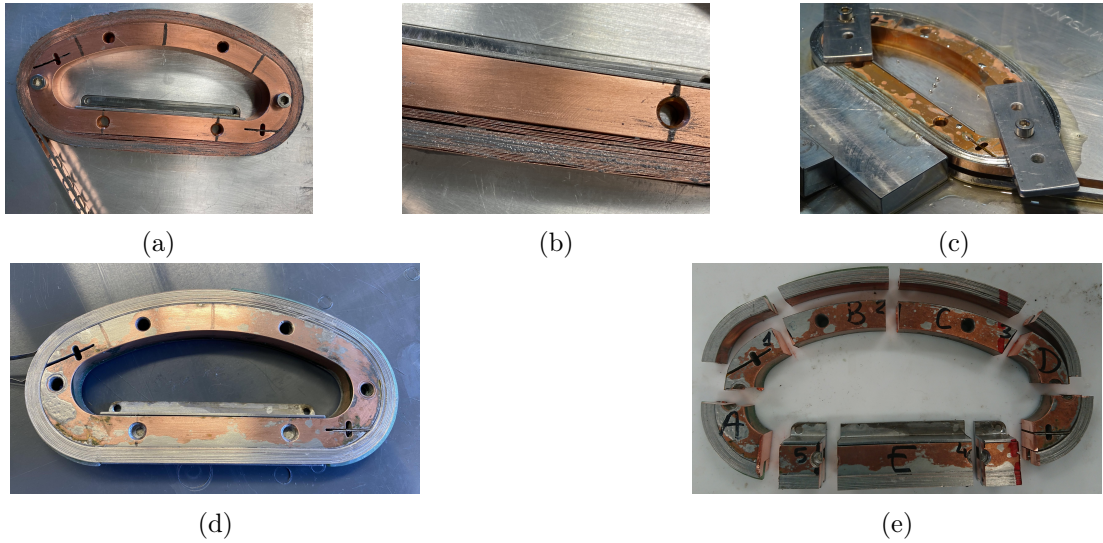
Wet winding trial of a VR coil with separated processes of winding and heating. (a) and (b) display the horizontal winding process with solder paste. (c) shows the heating and soldering process. (d) The resulting VR coil without the iron body. (e) This VR coil was cut to investigate the inter-turn soldering.
